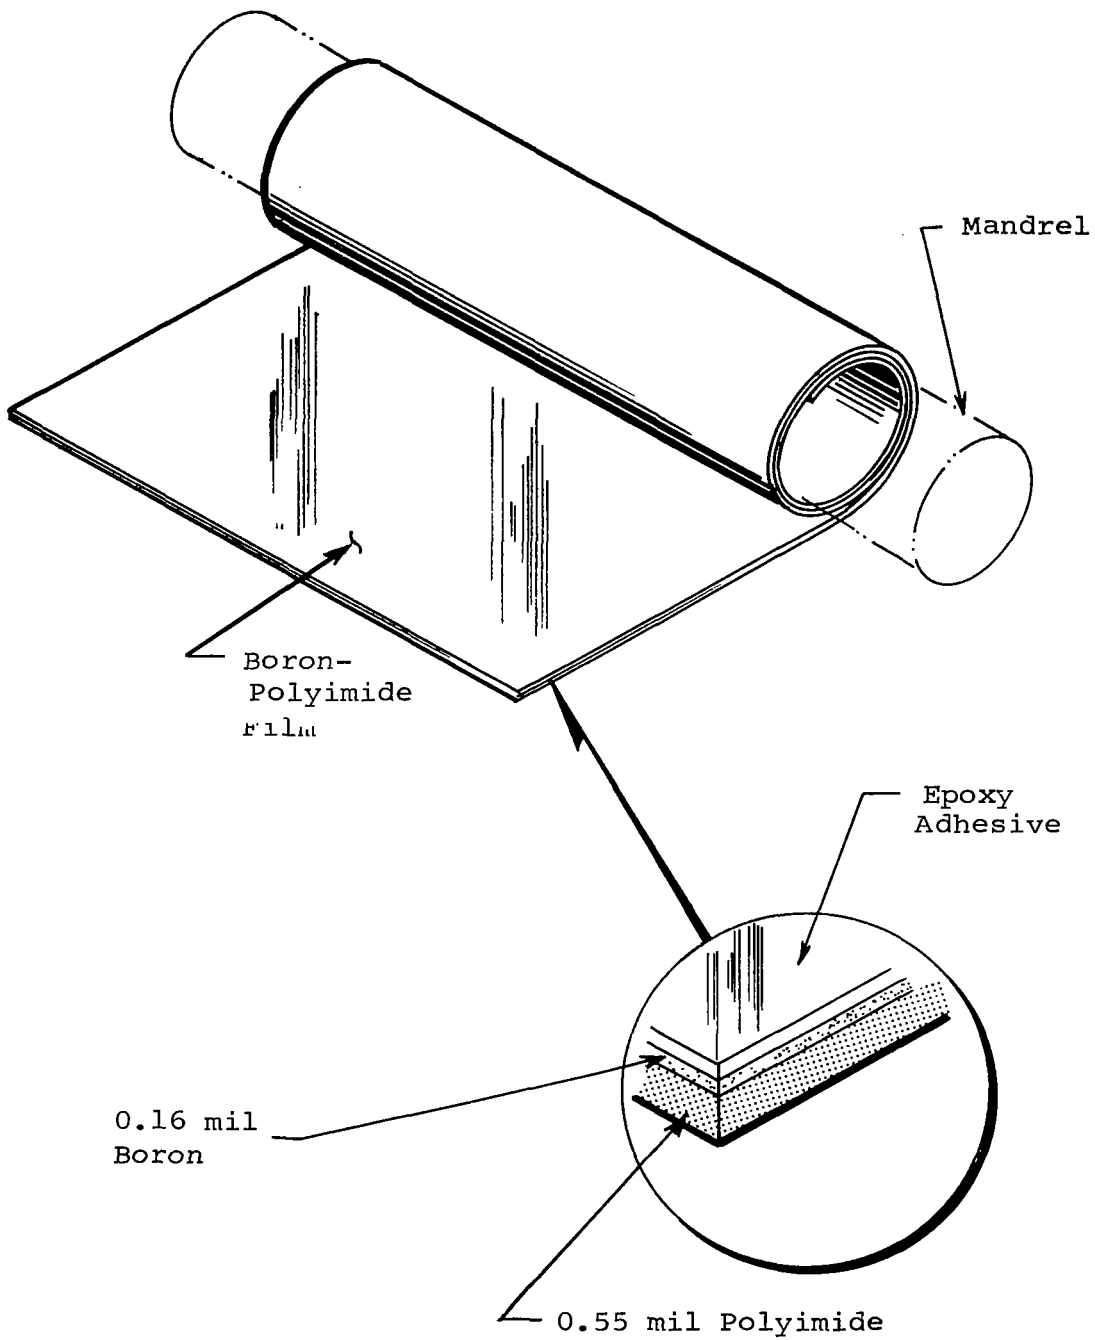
Schematic of Method Used to Fabricate Boron-Polyimide Tubular Test Specimens
